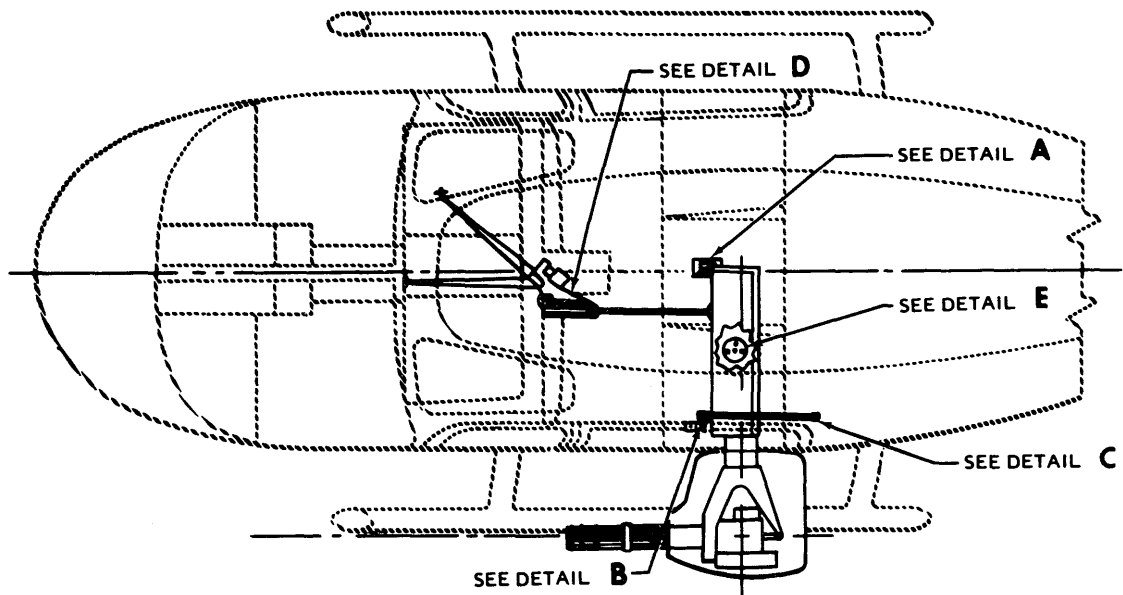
Armament Installation A (Sheet 1 of 4)
